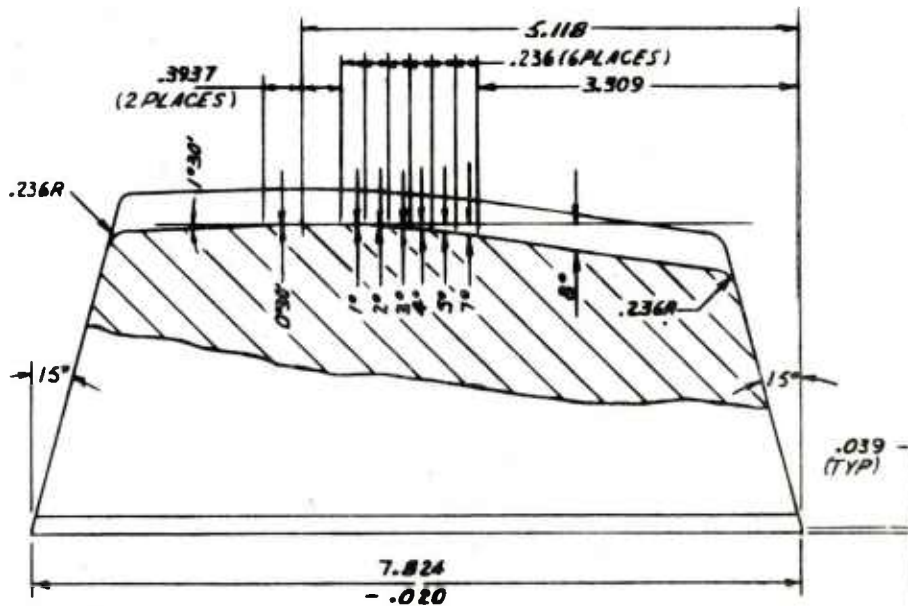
Rotary forging hammer - typical for 106mm I.D.
